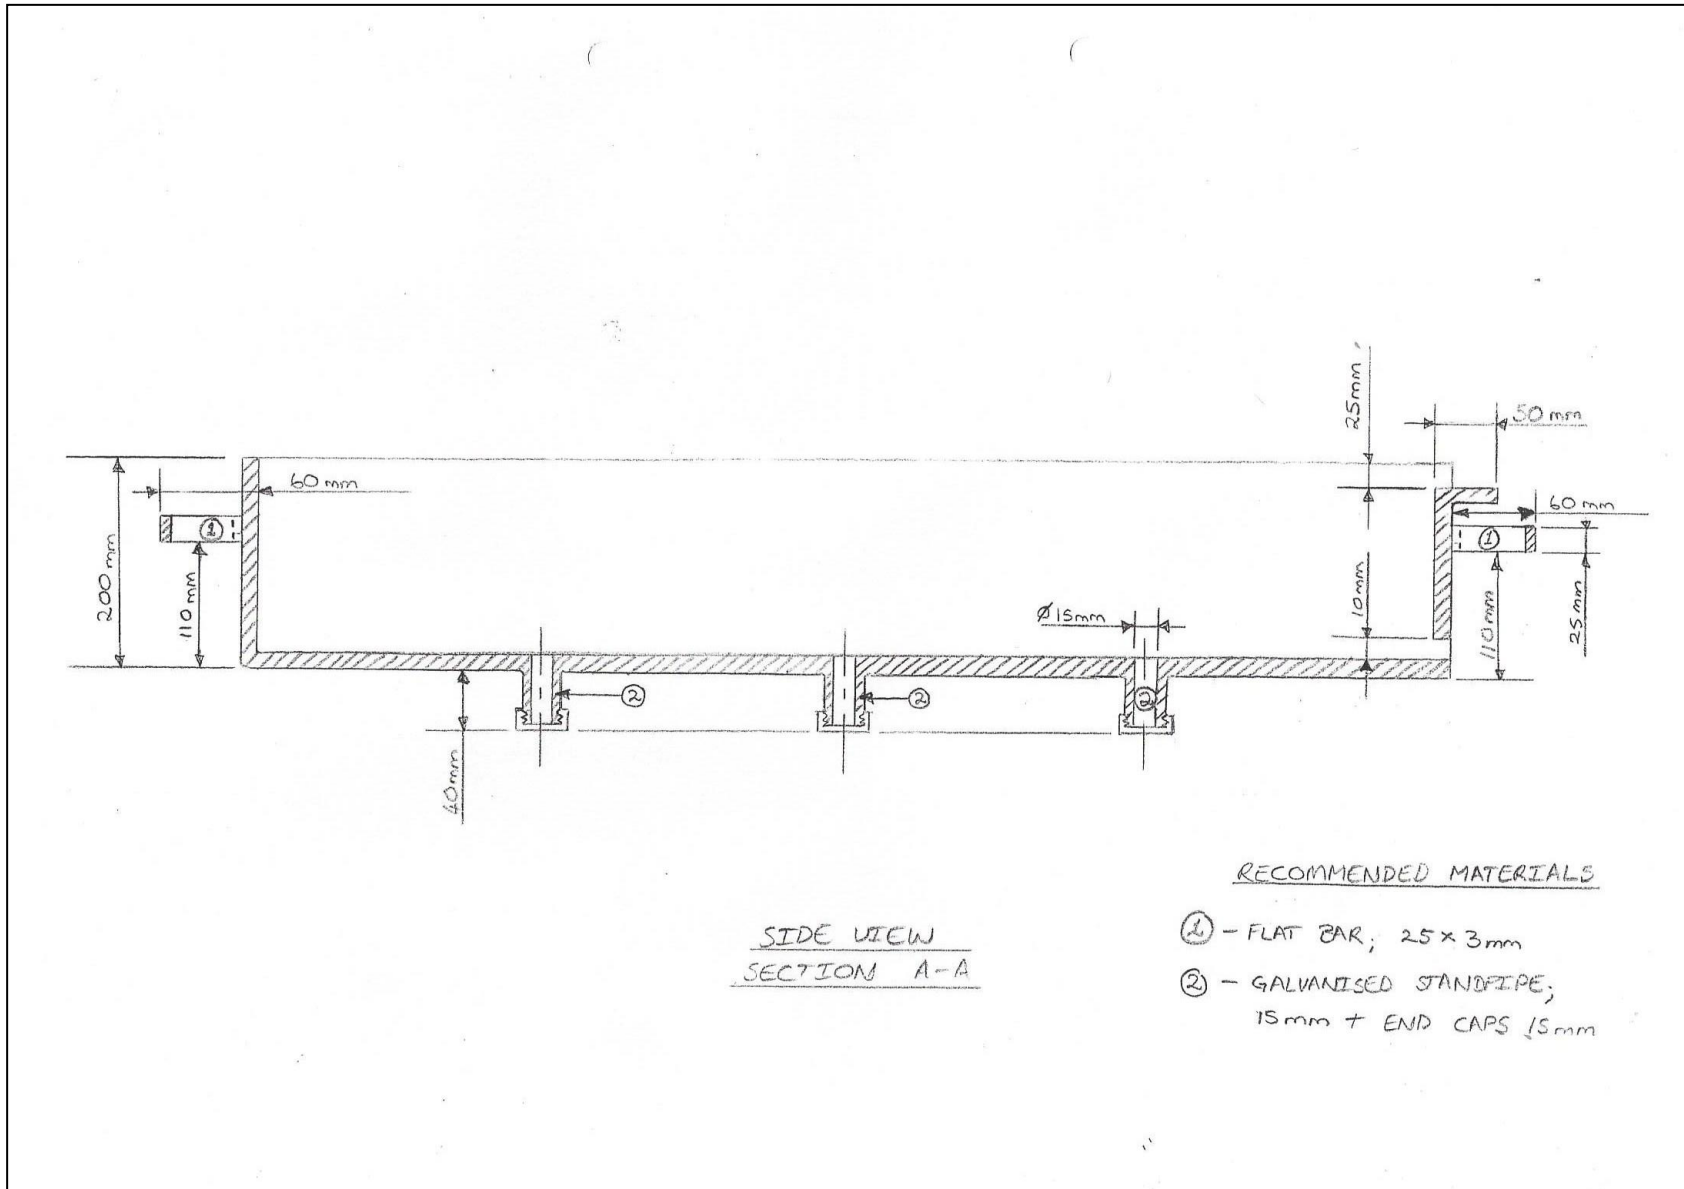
A section of the side view of the Basic Model Apparatus design drawing.
